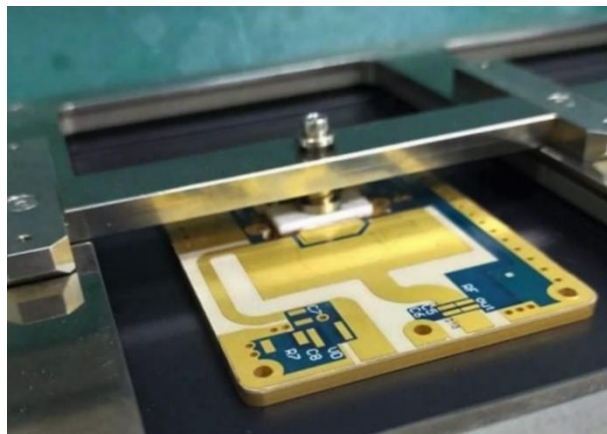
Reflow soldering jig applying uniform load on the transistor cap
